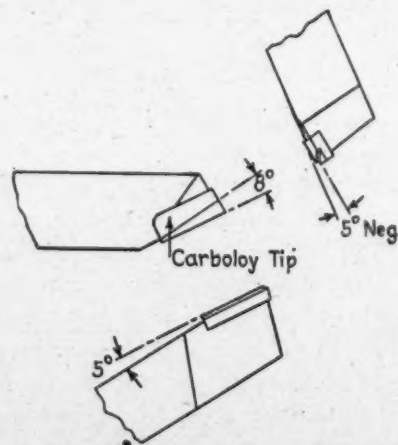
Enlarged view of the chip breaker section of the tool shown in Fig. 1 to show the negative rakes
